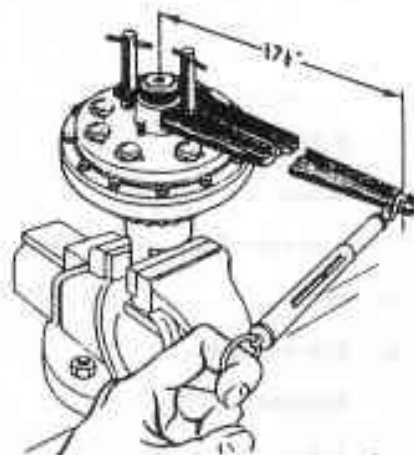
CHECKING SLIPPING LOAD OF DAMPER.
